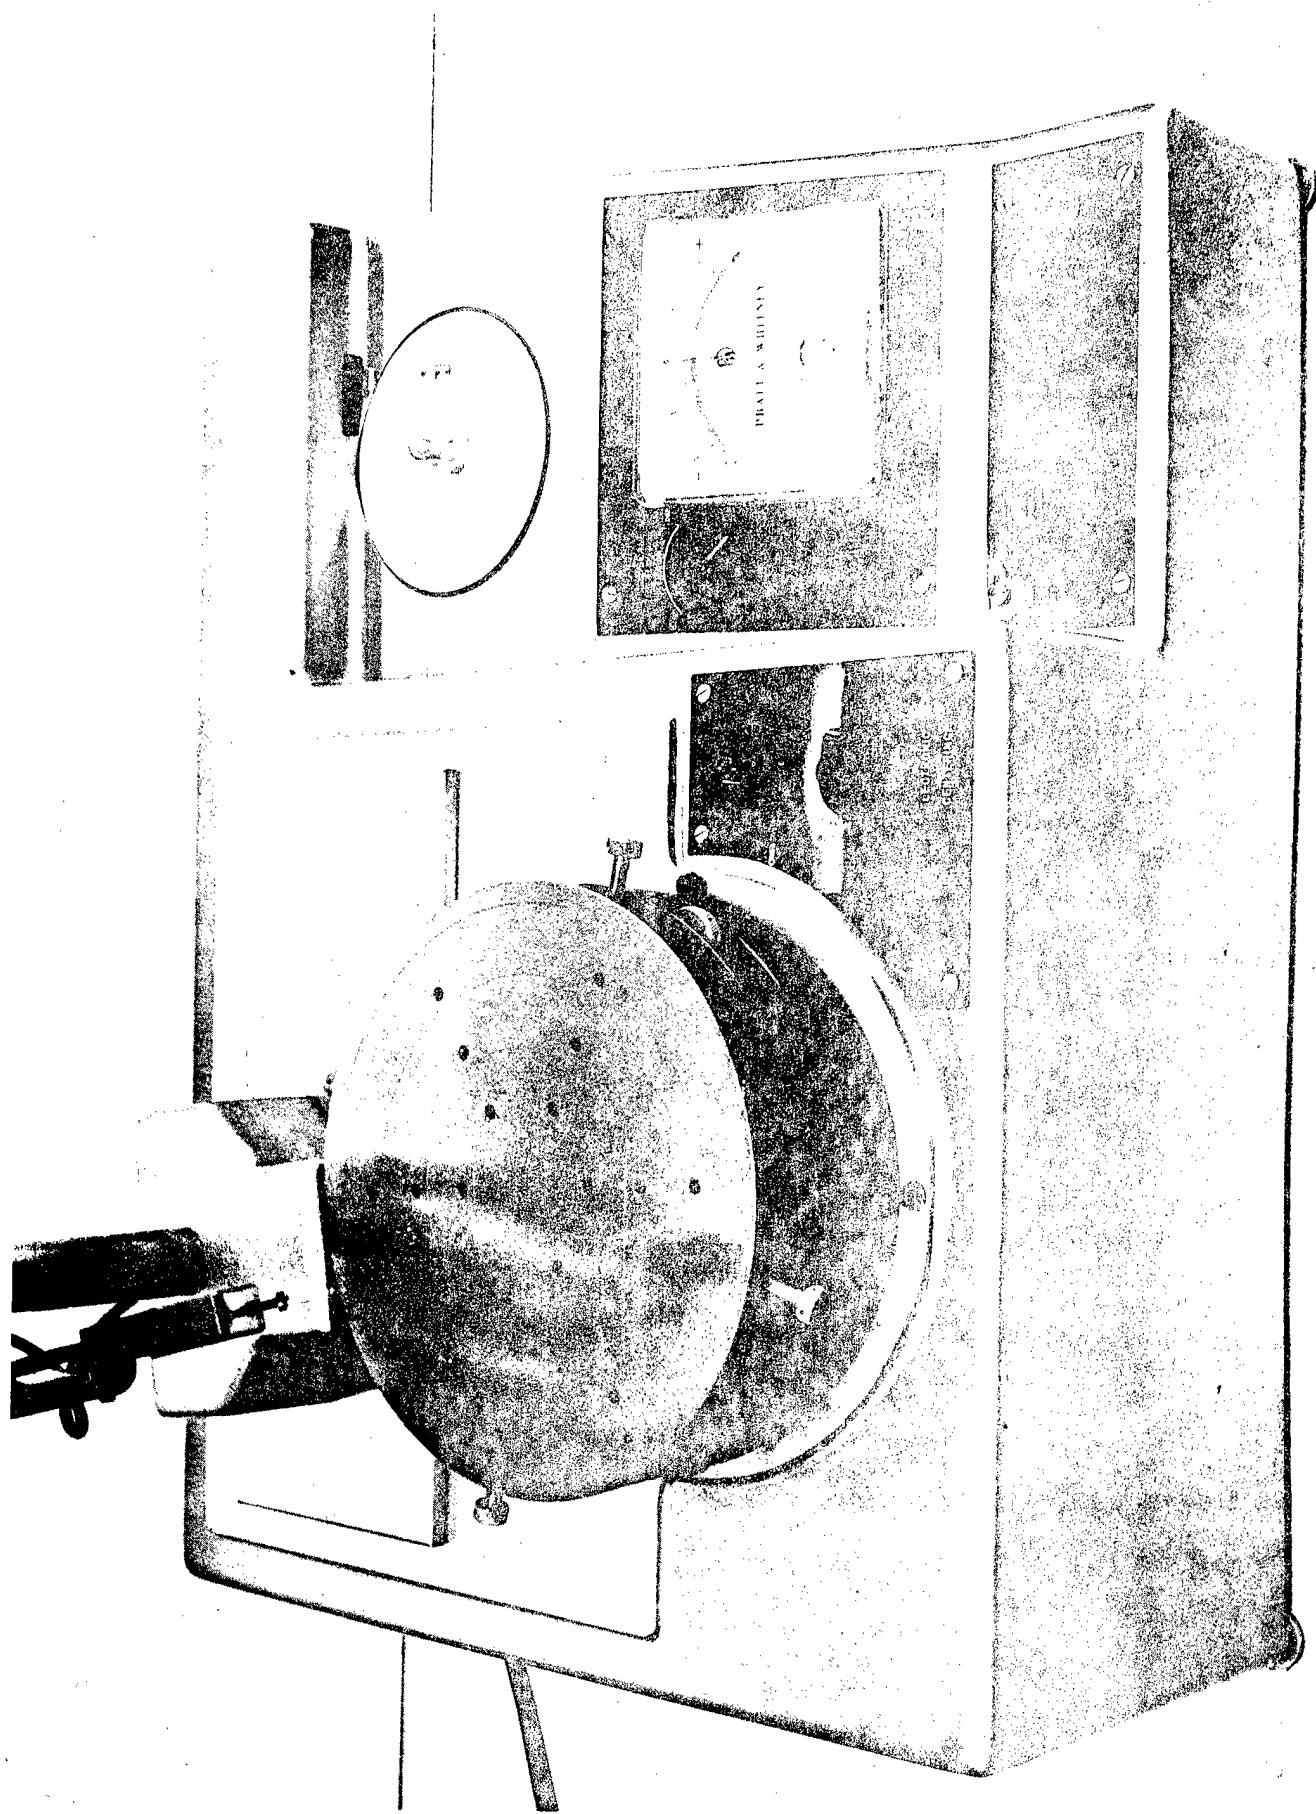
Closer view of attitude engine measuring machine with missile section mounted for gaging.
